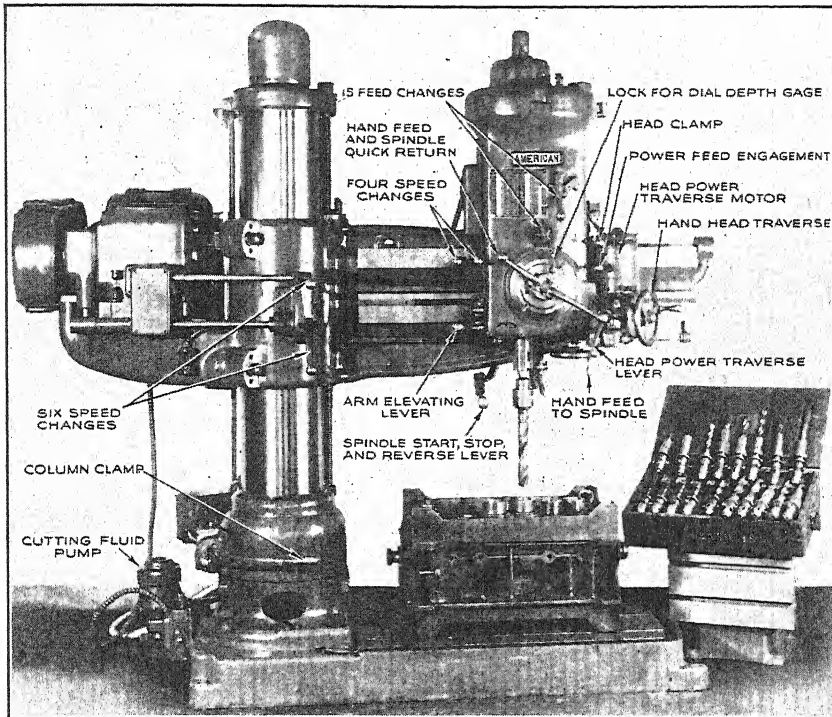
The American Tool Works Co. Triple-Purpose, 17-In.-Dia. Column Radial Drilling Machine.
